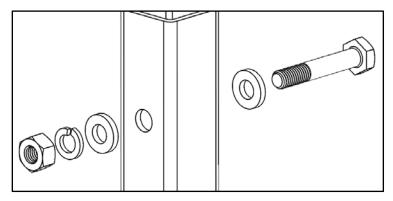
Typical Bolting Arrangement (3" Bolt Shown)
